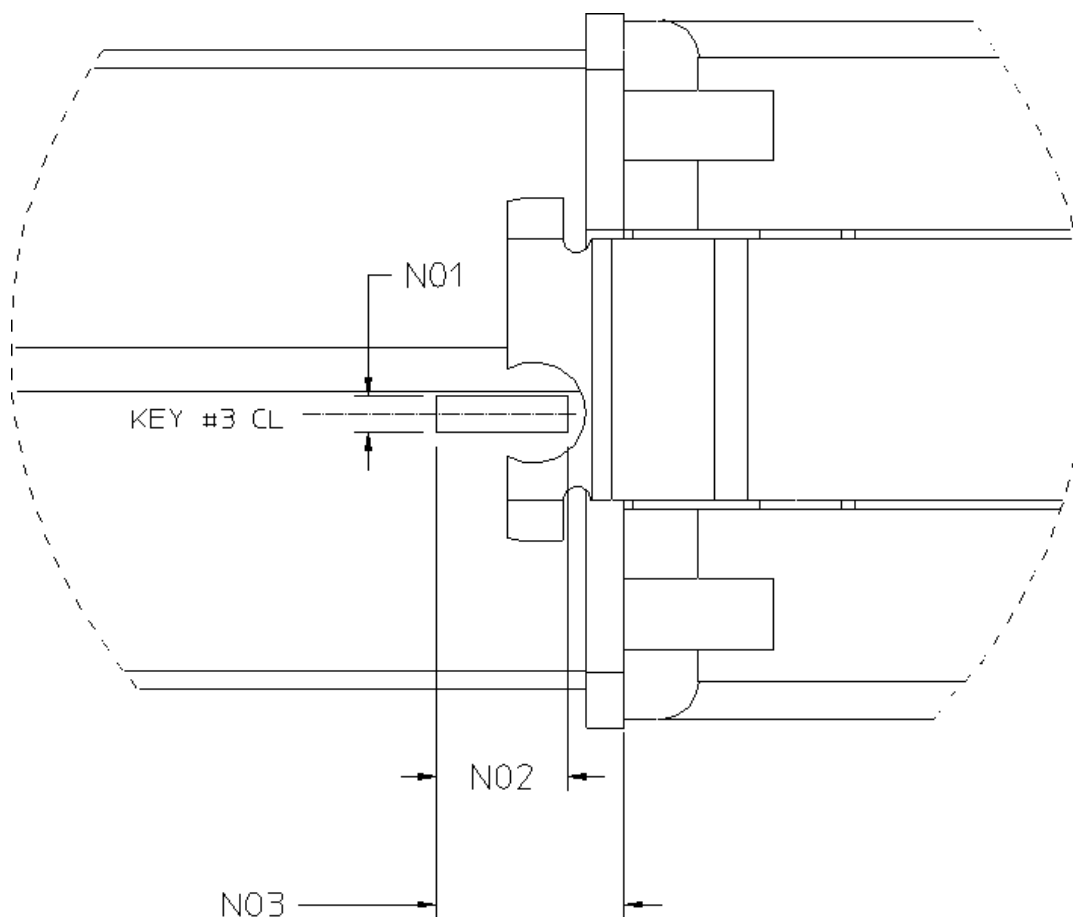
PLUG BLOCKING KEY DIMENSIONS - TOP VIEW
